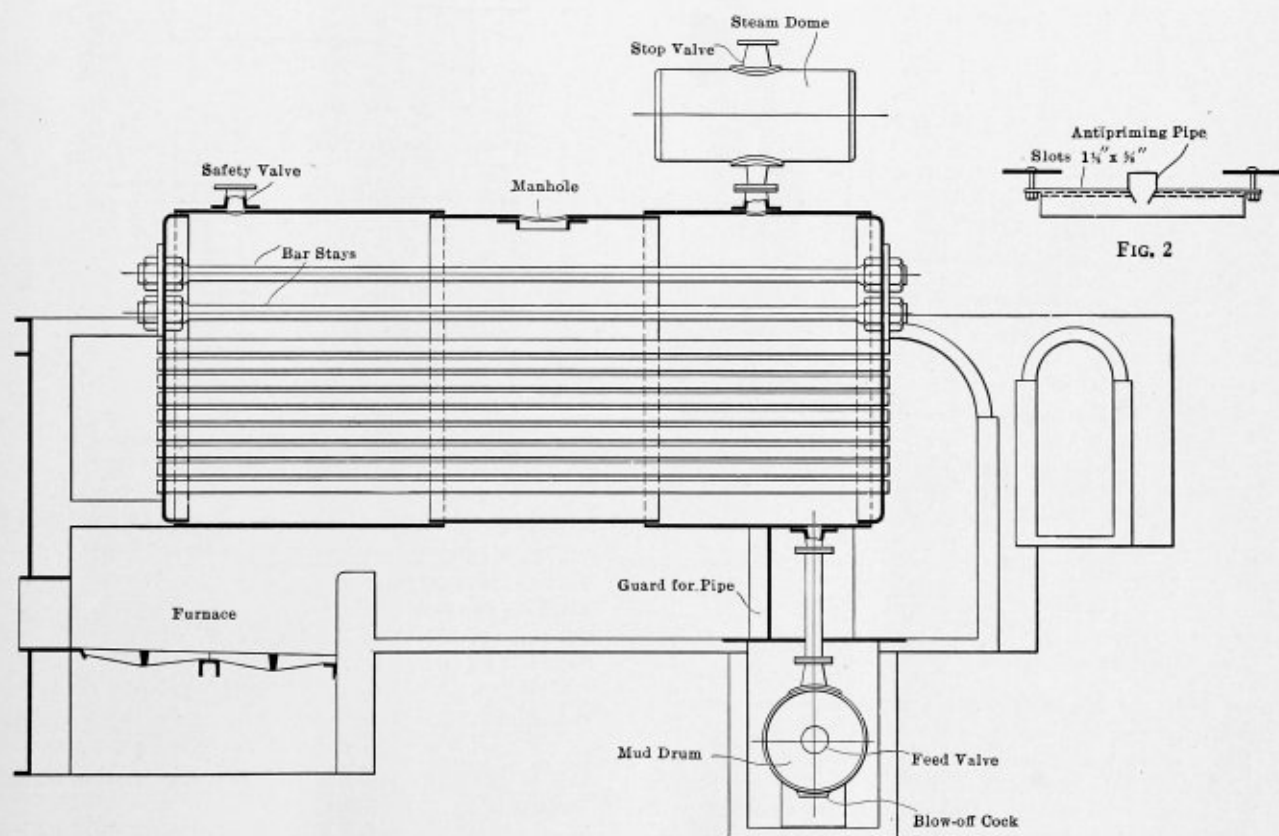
LONGITUDINAL SECTION OF UNDERFIRED BOILER IN BRICKWORK, COMPLETE WITH STEAM DOME AND MUD DRUM
